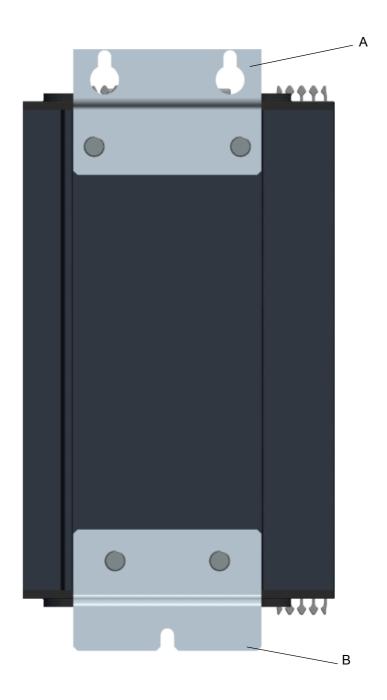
Bulkhead mounting (80A/100A unit shown; 125A similar)
